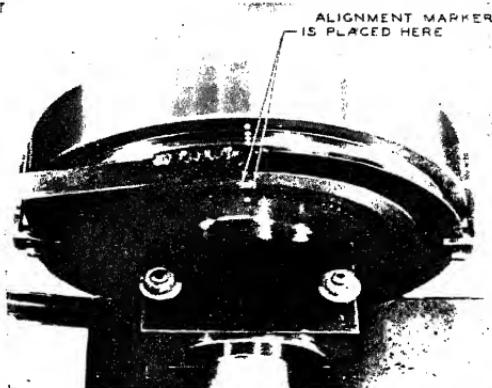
Locating friction damper assembly in pressure setting jig.
